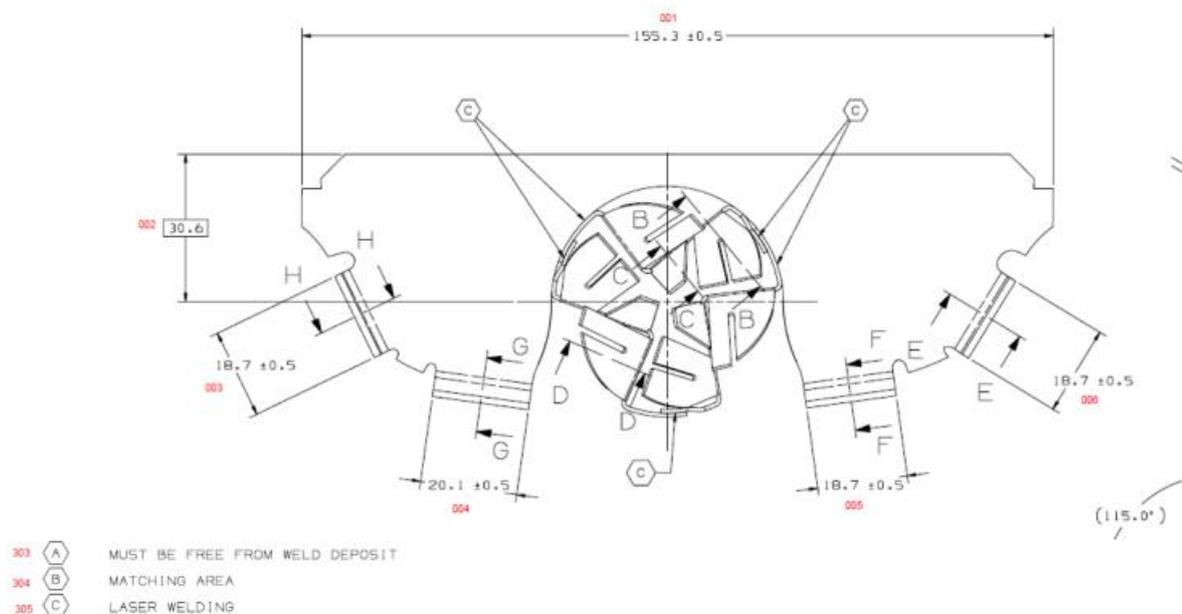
Stage 1 technical drawing, detail of welding points [7]
